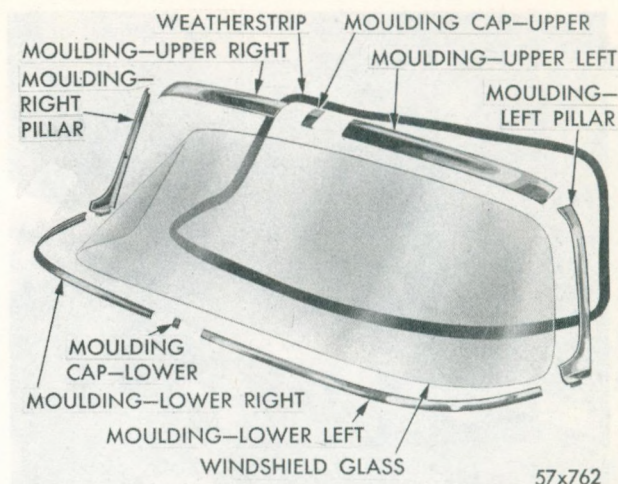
Windshield and Moulding Assembly (Imperial Models)
